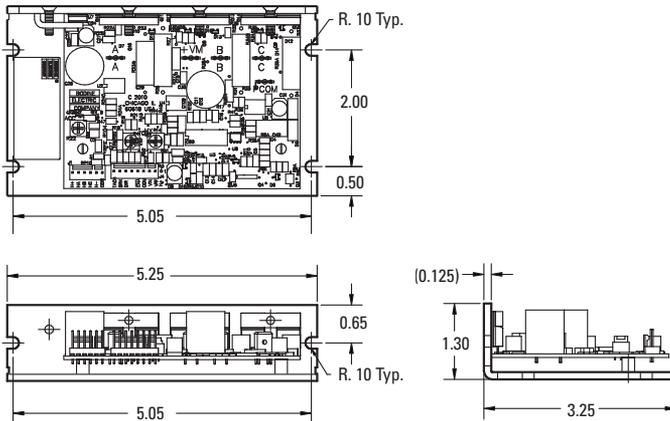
Use the dimensions shown to locate the mounting holes on the surface where the control is to be located. The control should be mounted vertically, using the slots on either the narrow or wide surfaces of the heat sink. This arrangement provides optimum air flow around the control.
